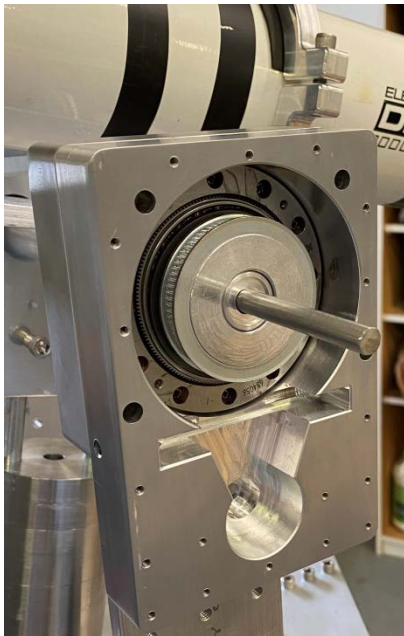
New pulley drive chassis case secured into the assembly of Figure 12
